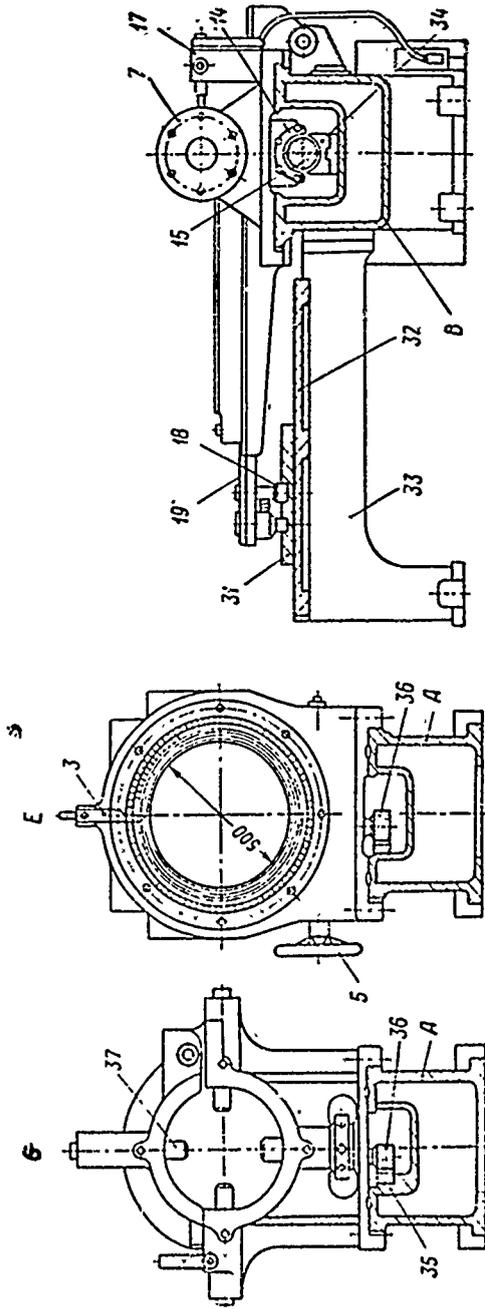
Sectional cut of mount of rifling machine shown in Fig. 123
